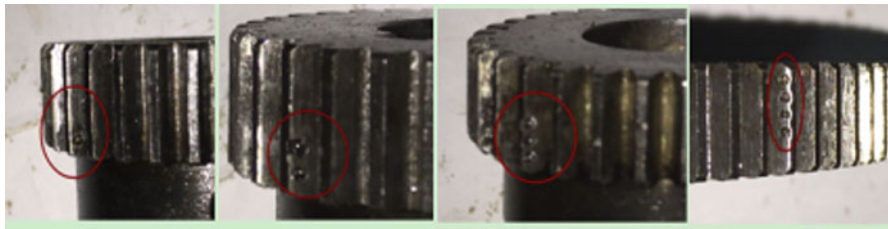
Four gears with different degrees of pitting corrosion failure (the tooth surface contains 1, 2, 3, 4 pits respectively)
